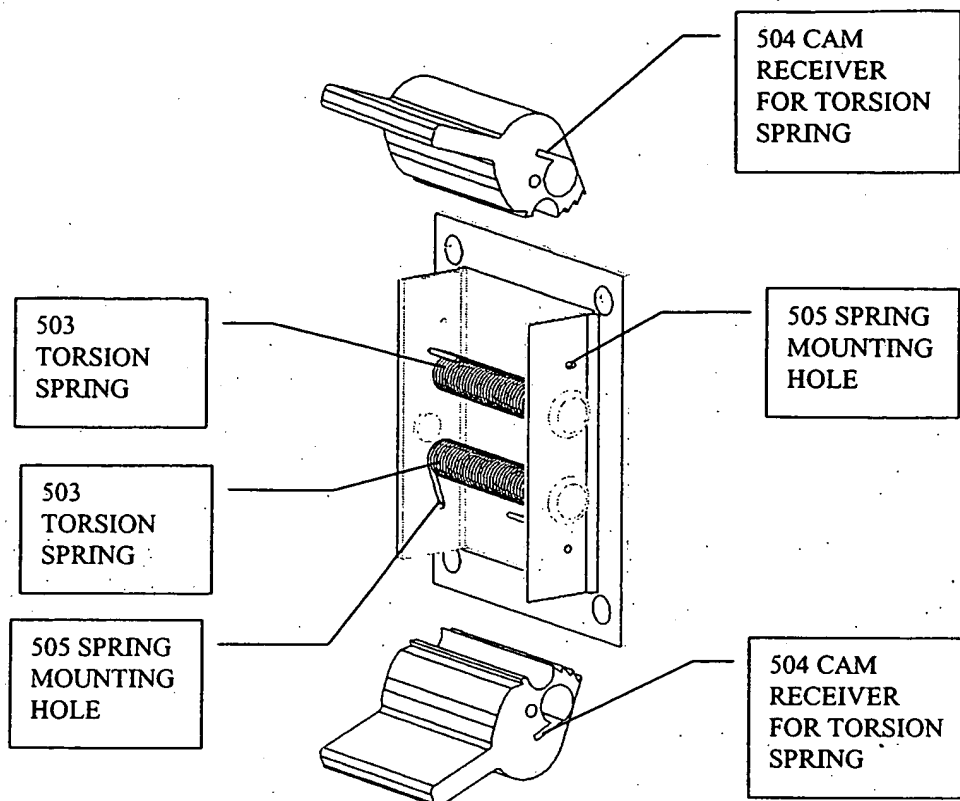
Alternative Embodiment with one cam having limited rotational freedom, exploded.
